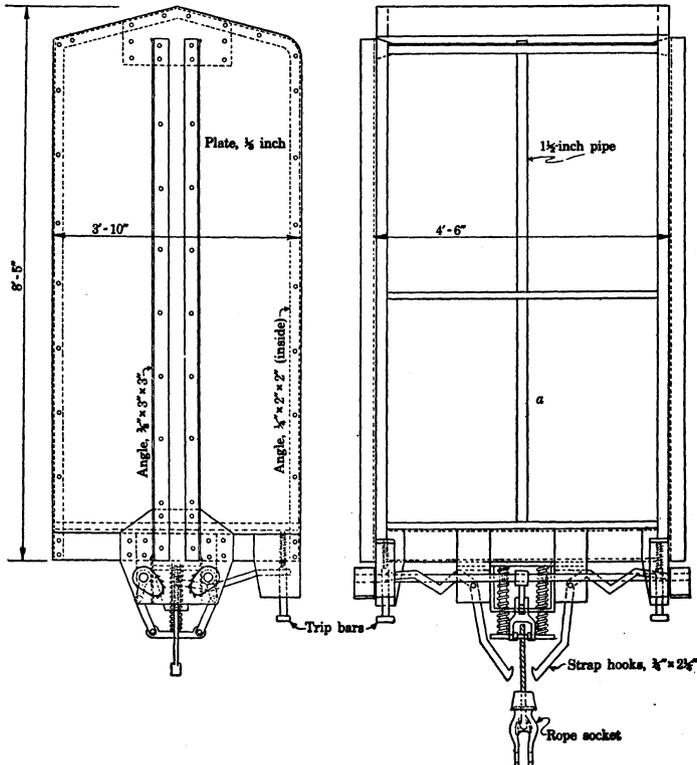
Safety crosshead used in sinking Eureka shaft
